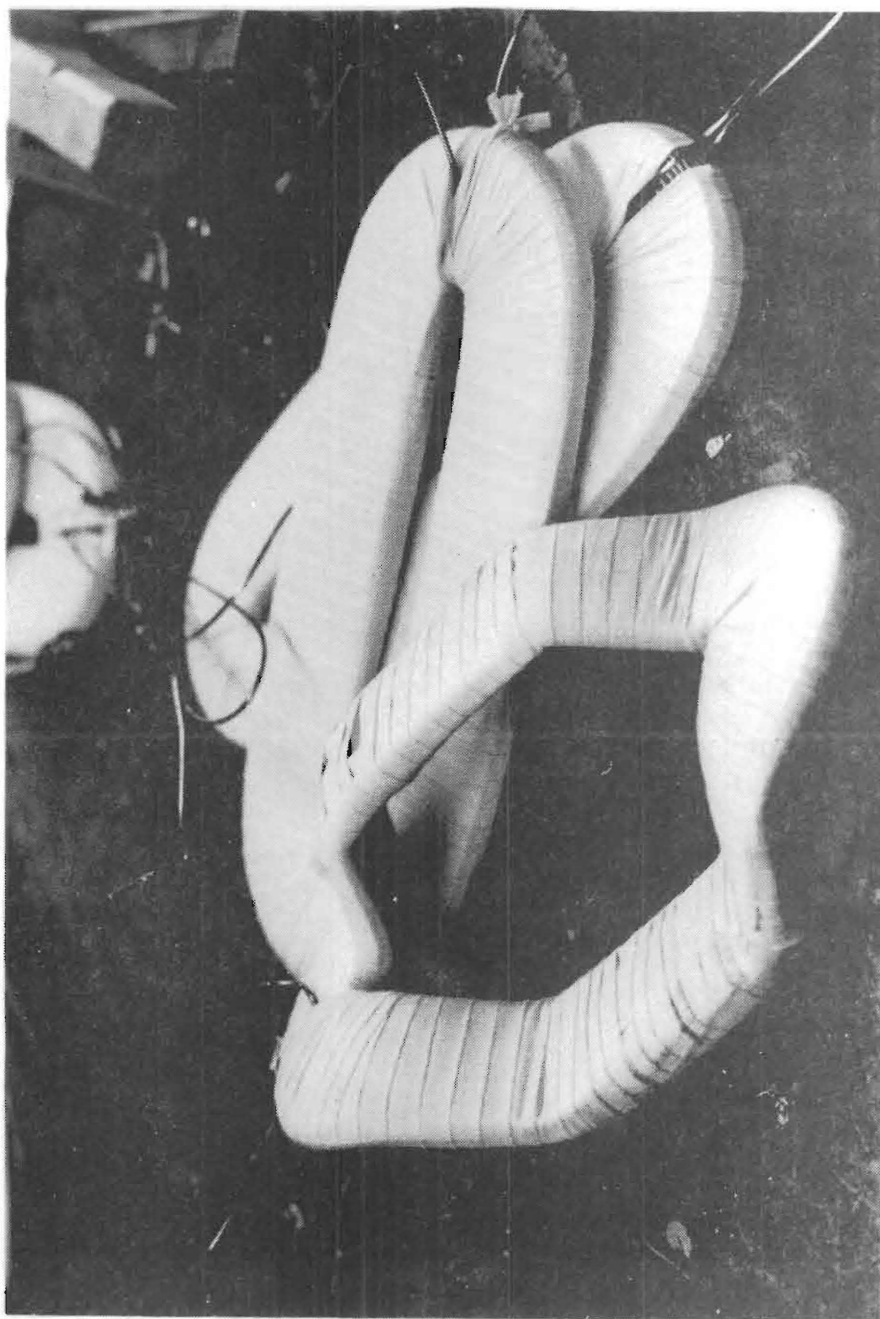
The prewound flat coils and the double sided coil after being pulled into shape.
